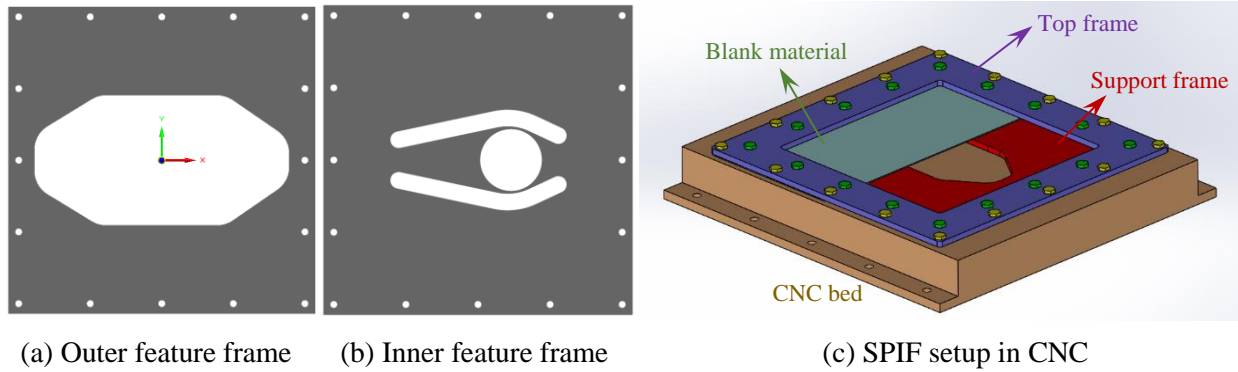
Back - support frames designed and manufactured for fabrication of fuel cover part using SPIF process
